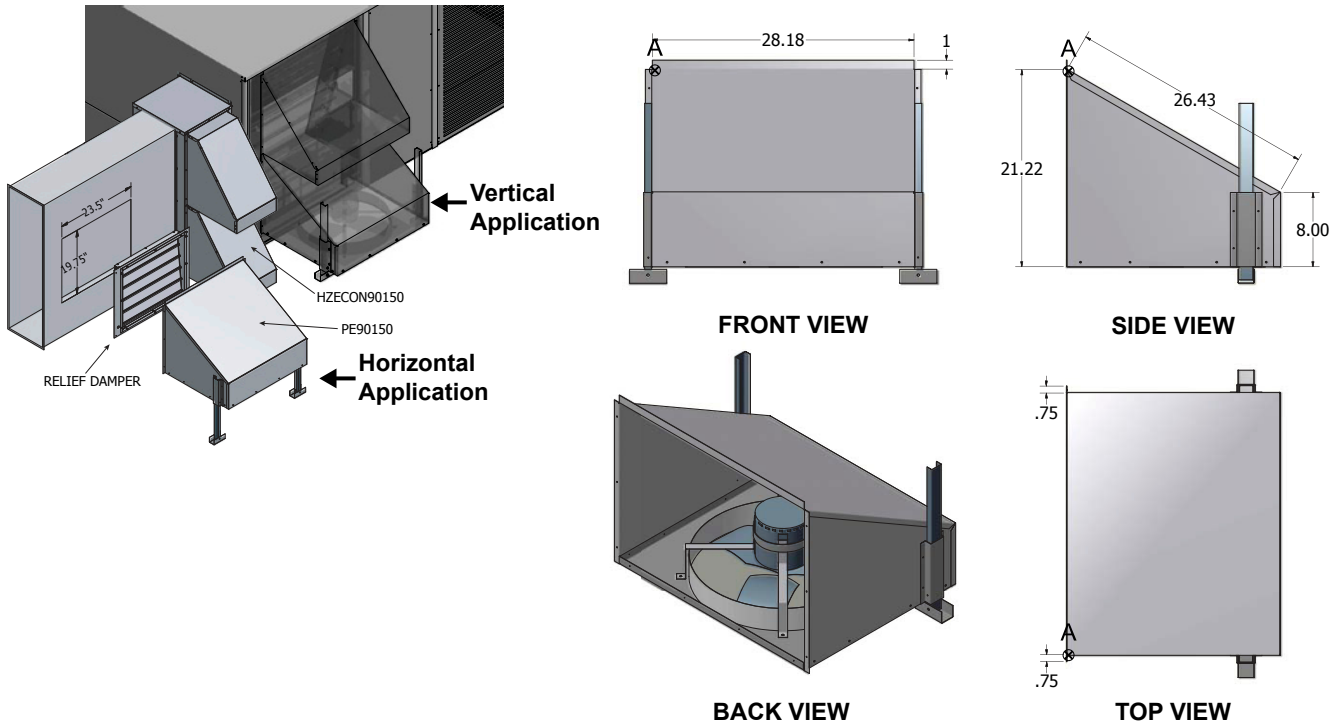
Dimensions—Power Exhaust, 036–072 Model Sizes
